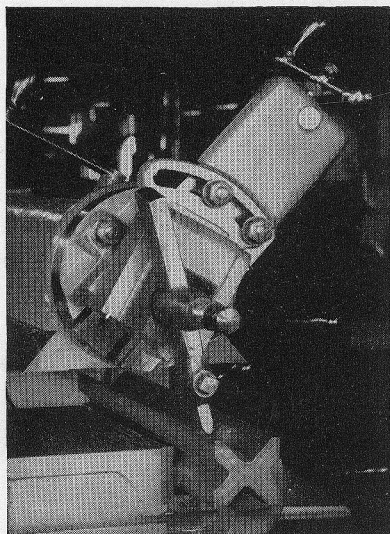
Another type of shaper toolholder. (*Armstrong Bros. Tool Company*)
